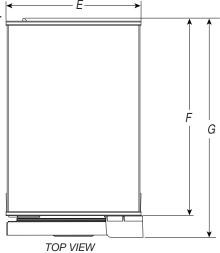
# DETAILED PLANNING DIMENSIONS 15" ICE MACHINES
